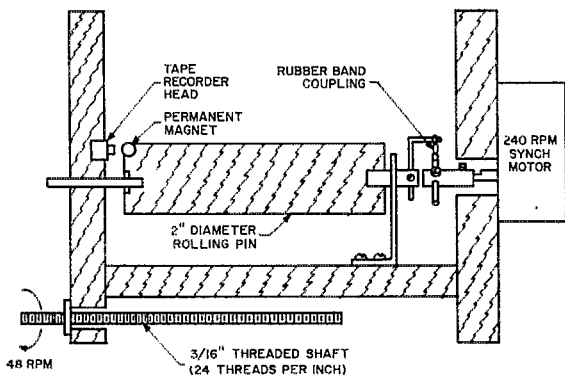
The drum and carriage assembly, showing the synchronizing system using a tape-recorder head and permanent magnet. The carriage is moved along a track by the lead screw for line-by-line scanning.
